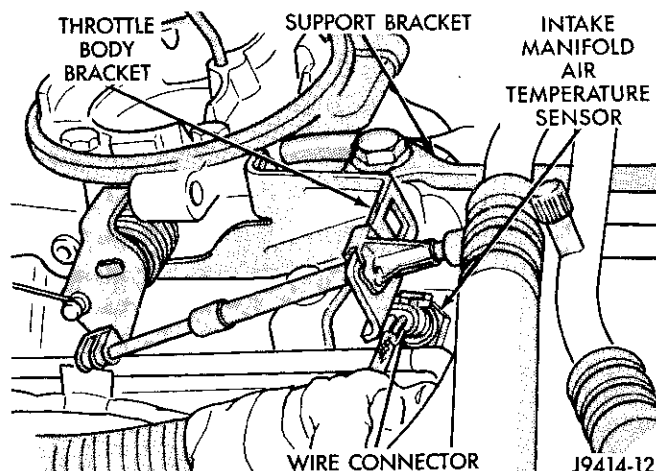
Support Bracket—Generator Mounting Bracket-to-Intake Manifold—Typical
